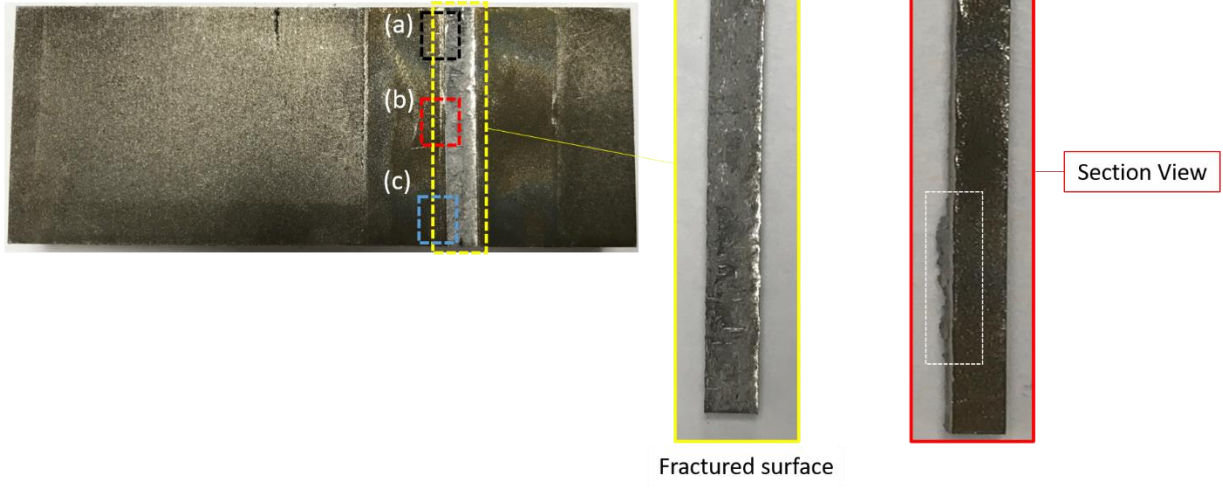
Optical micrographs – fracture location of shear test specimen (5)
